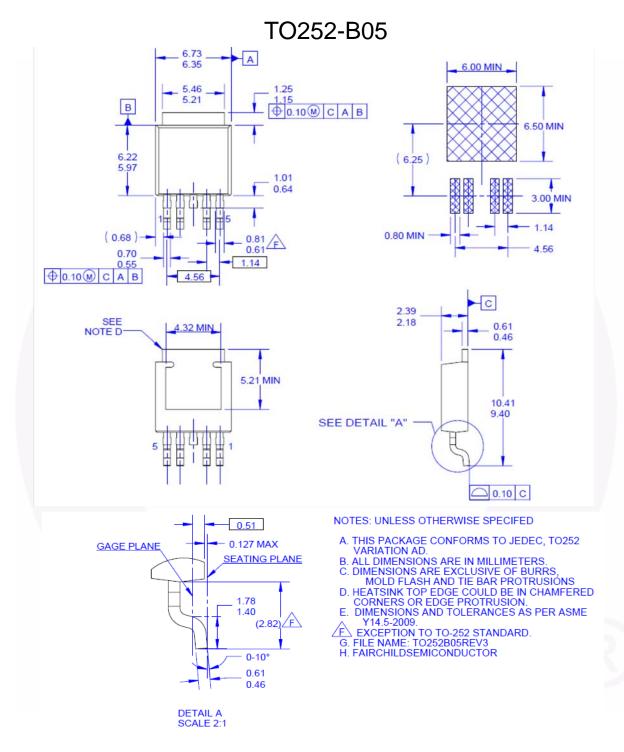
TO-252 5L (DPAK) - 5LD, MOLDED TO252, OPTION AD
